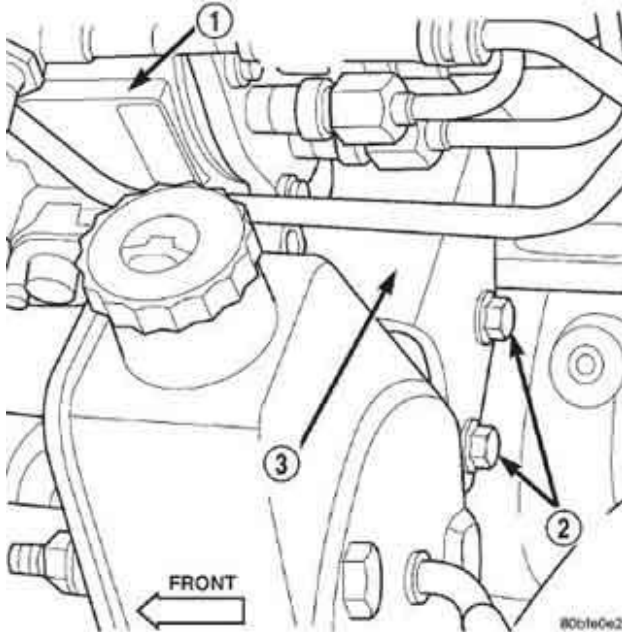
Rear/Lower Pump Bracket and Mounting Bolts
